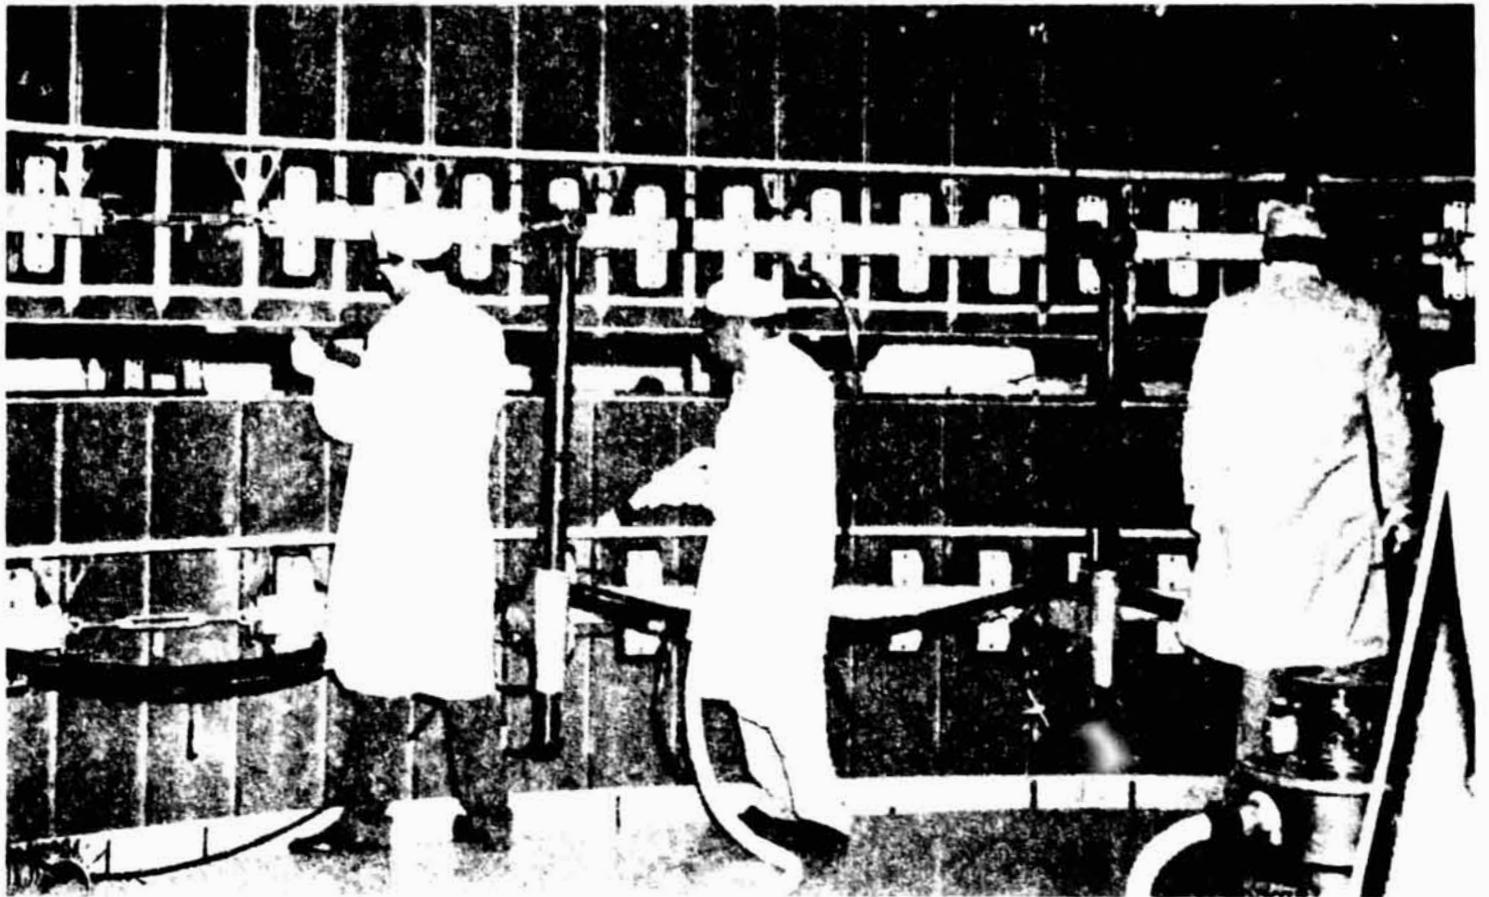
Draw-File Cleaning of Inboard Weld Surface
